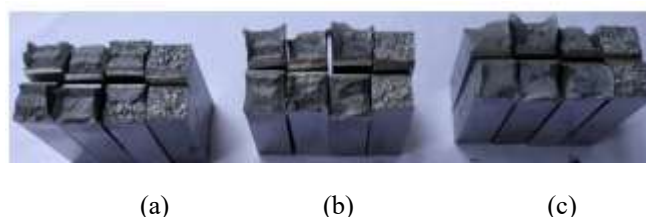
Charpy Impact Test Specimen. (a) Single V Groove, (b) Single Bevel Groove, (c) Double V Groove
